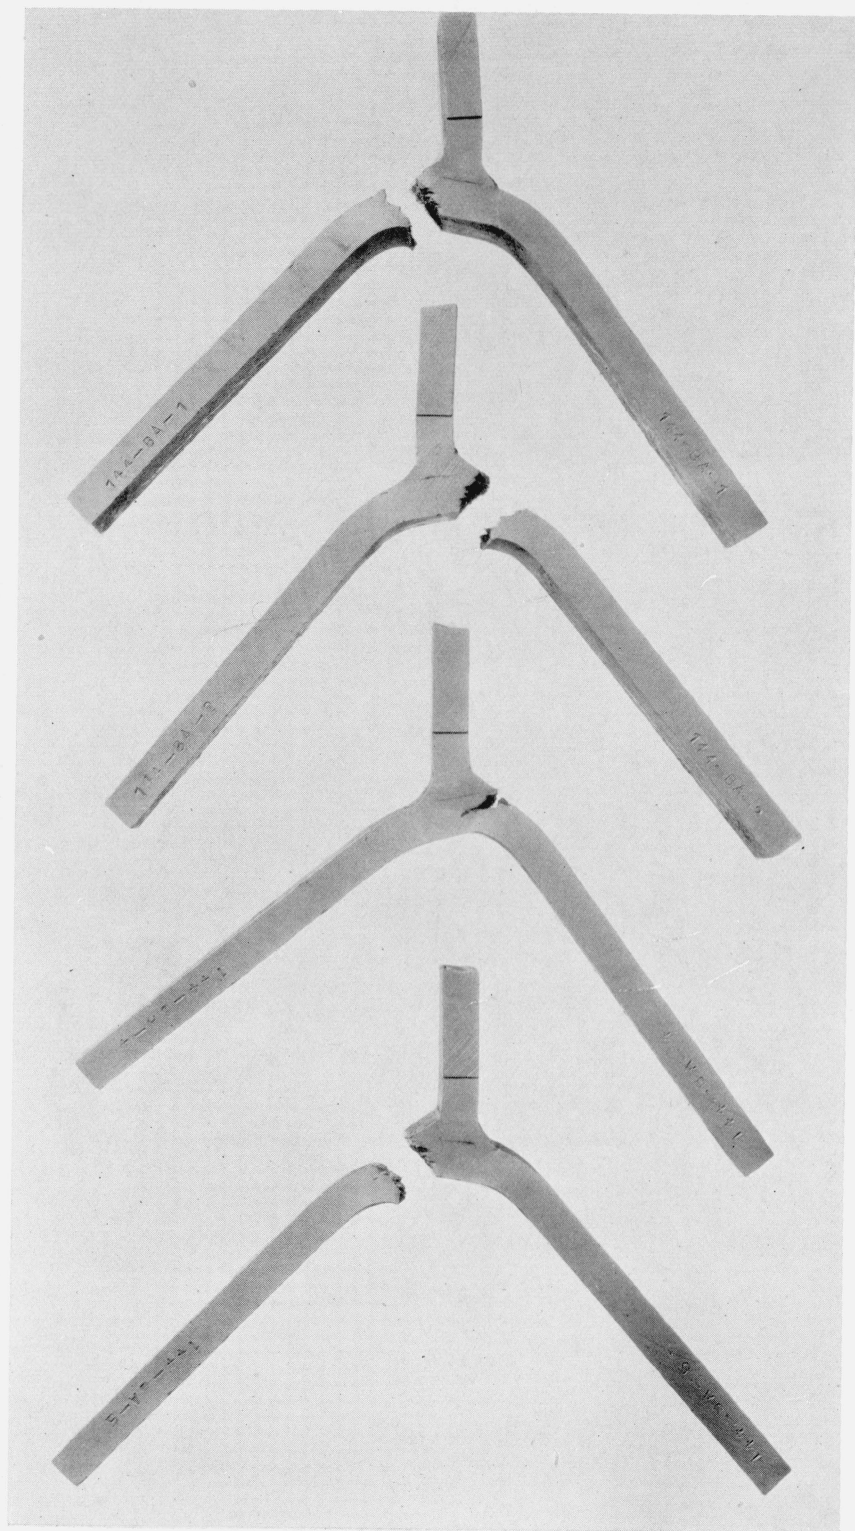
Steel 144, $\frac{1}{2}$ -in. plates, welded as rolled.
